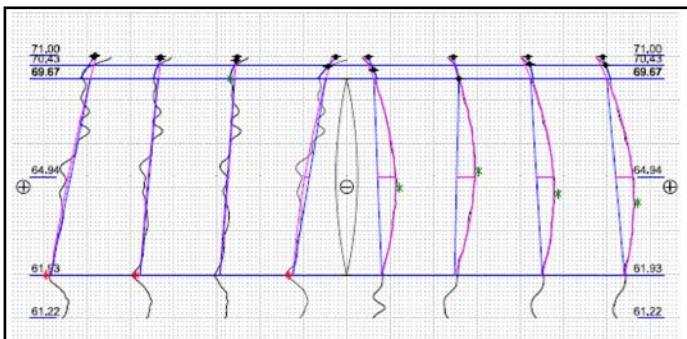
Gear flanks after testing; left flank is driven flank and right flank is the coast flank that has not seen any contact.
